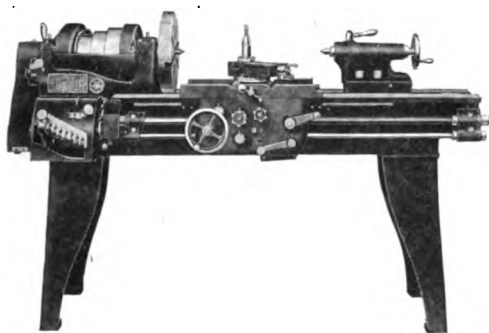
Monarch 14-Inch Lathe with Quick Change Gears
